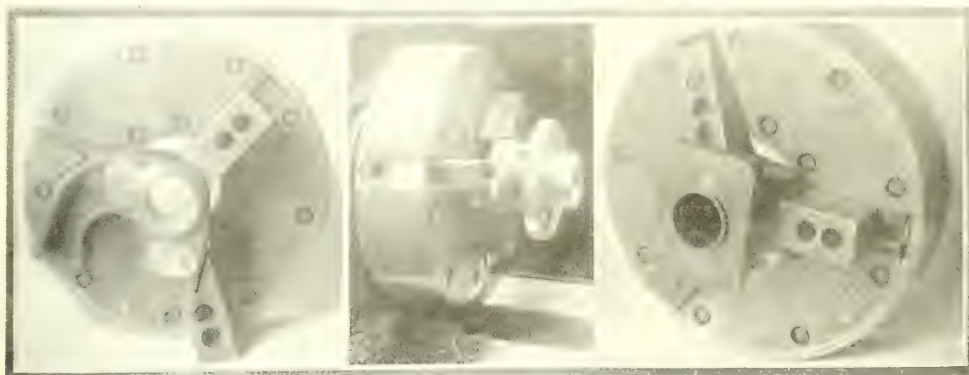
EXTREME LEFT VIEW. SPECIAL JAWS FOR ROLLER FEED BOX TOOL FRONT PLATE.
